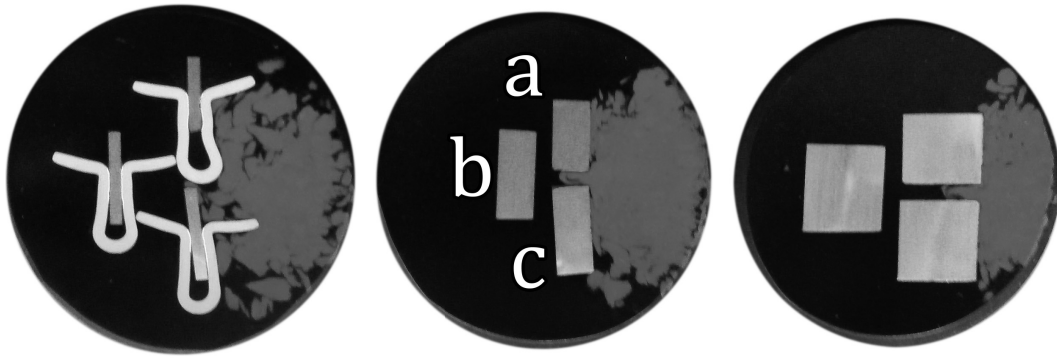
Mounted sections, sheet faces aligned towards blue molding compound (grey in image) in the order shown, white clamps were used to hold 1 mm samples upright
